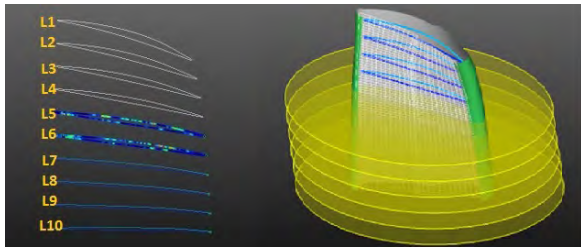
The deflection error calculation from the CAD model of turbine blade and generated NURBS surfaces of machined turbine blades
